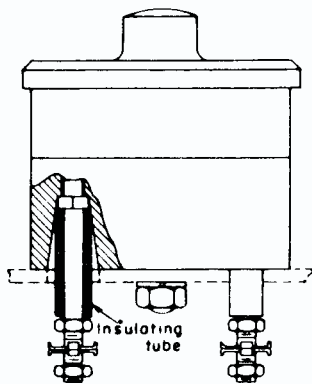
(8918488B) Mounting on Front of Steel Panel
